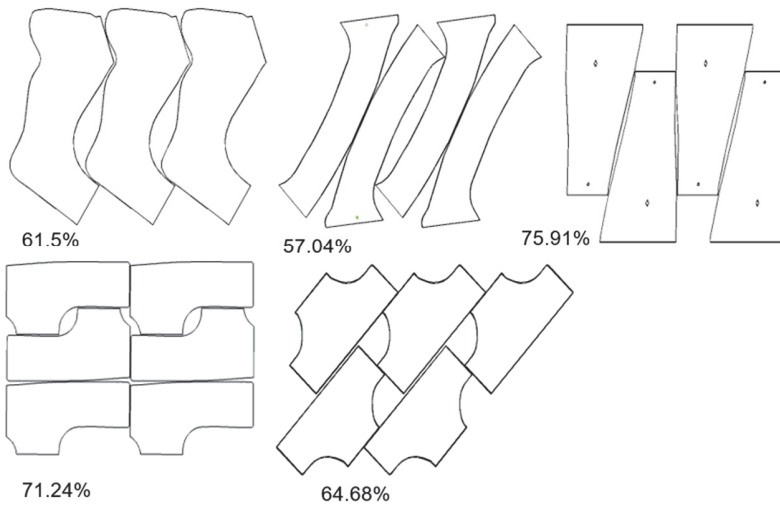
Blanking and utilization rate of spliced welded sheet materials
